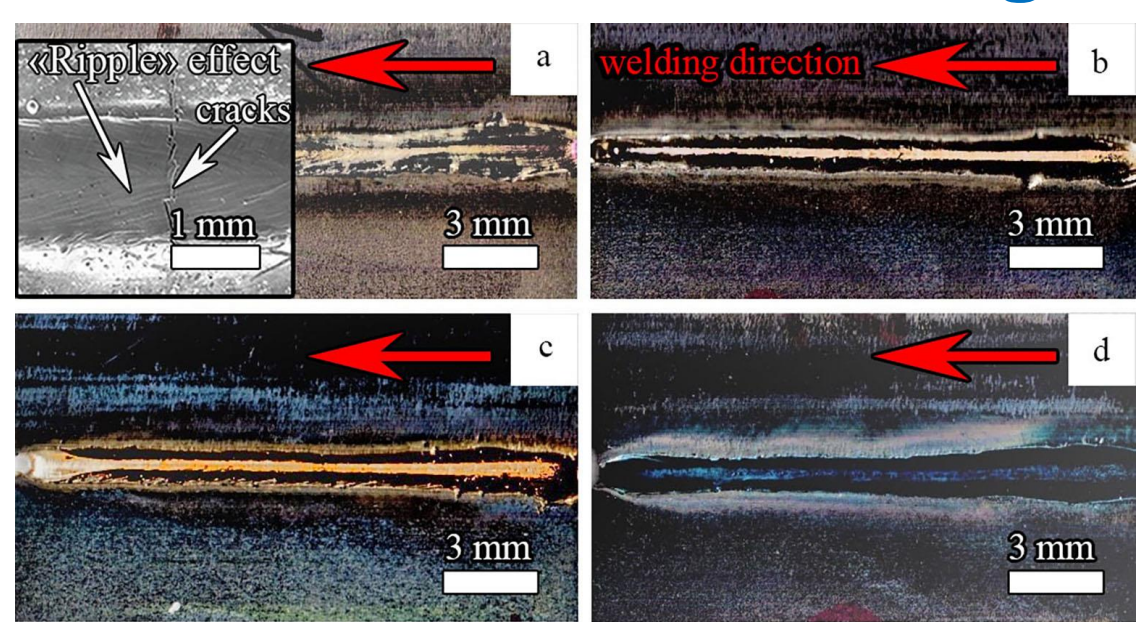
Appearance of welds obtained at: a) room temperature; b) preheating 400 °C; c) 600 °C; d) 800 °C. The red arrows indicate the direction of the laser beam welding
